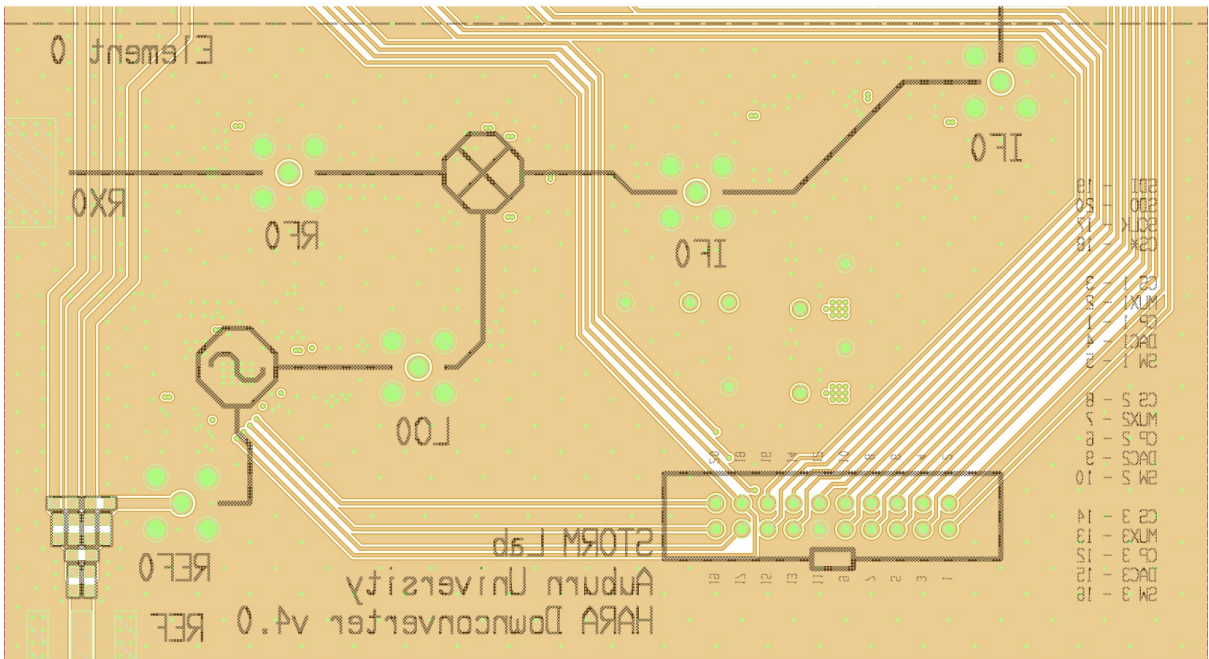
DLL-HPC received signal beamformer back-side PCB layout for element 0
